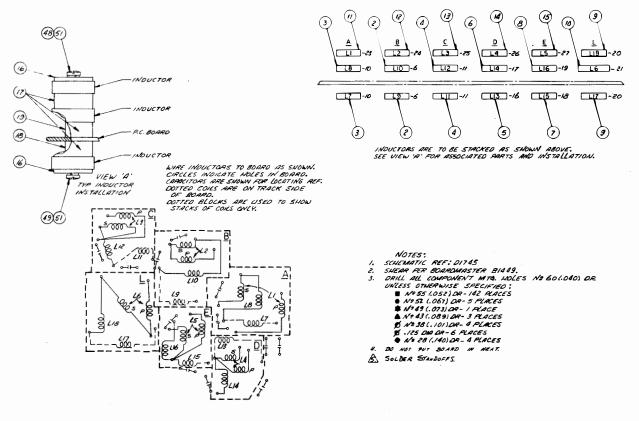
Preselector, Board Assembly NO730-J5 thru J8-D1746F 1.4
